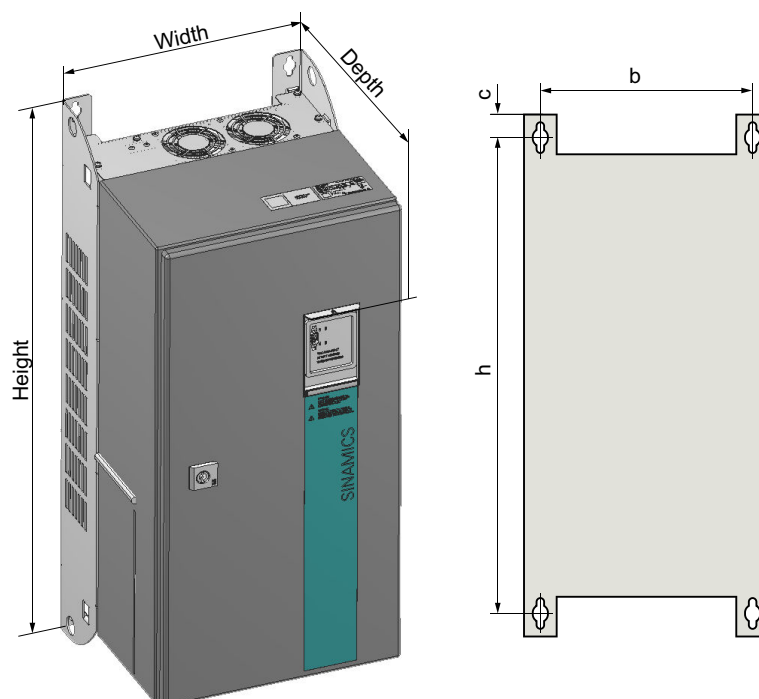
Dimension drawing, PM230 Power Module IP55 FSD ... FSF
